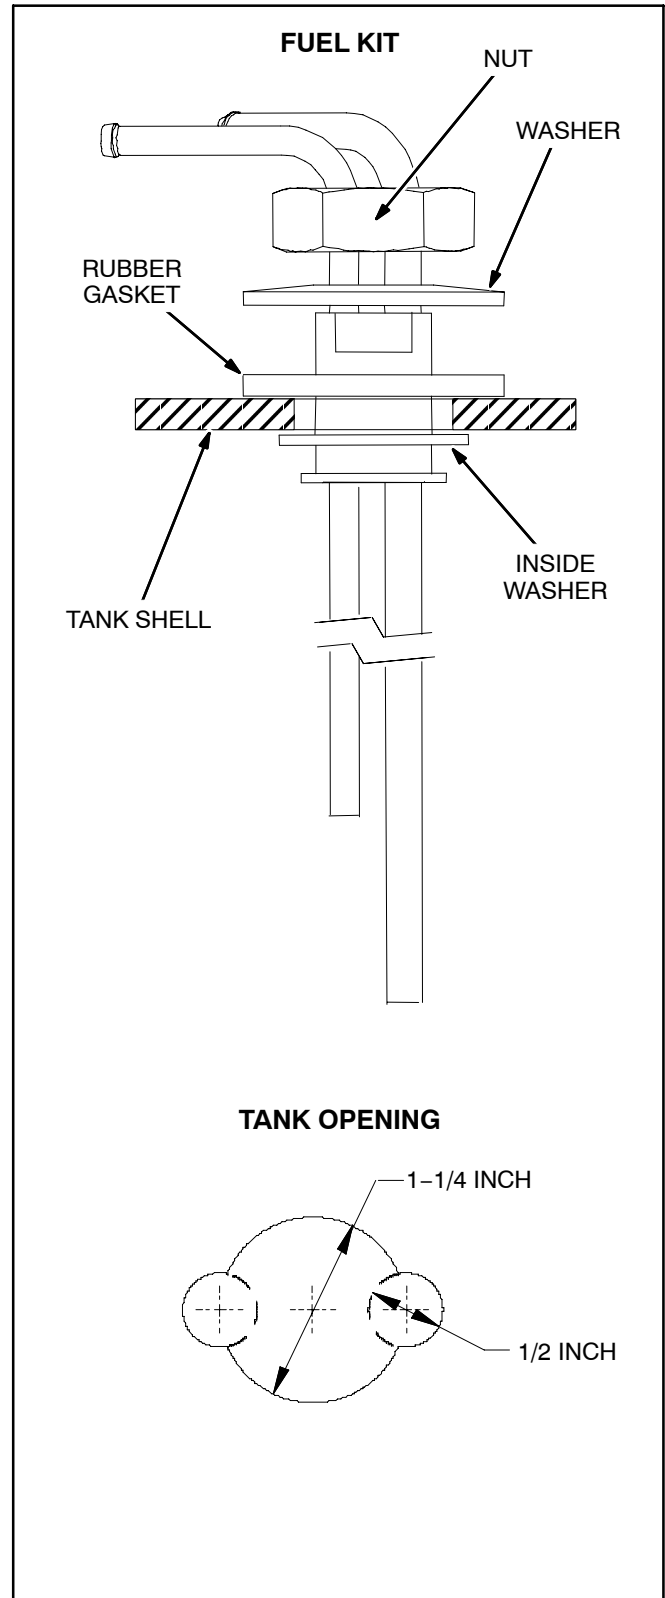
FUEL PICKUP TUBE ASSEMBLY
